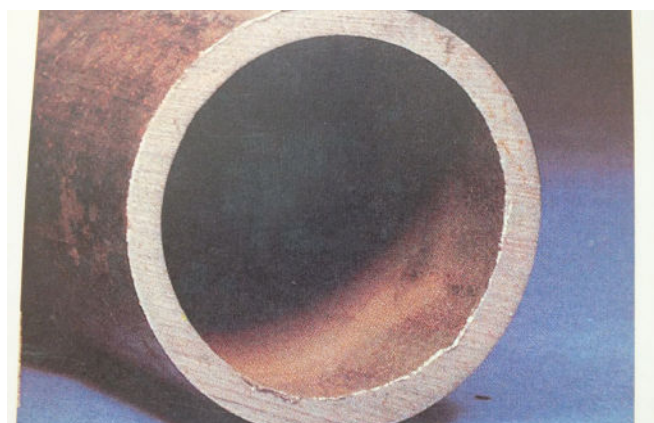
B-1: Cutting by reciprocating power saw (Courtesy: csunitec.com)
